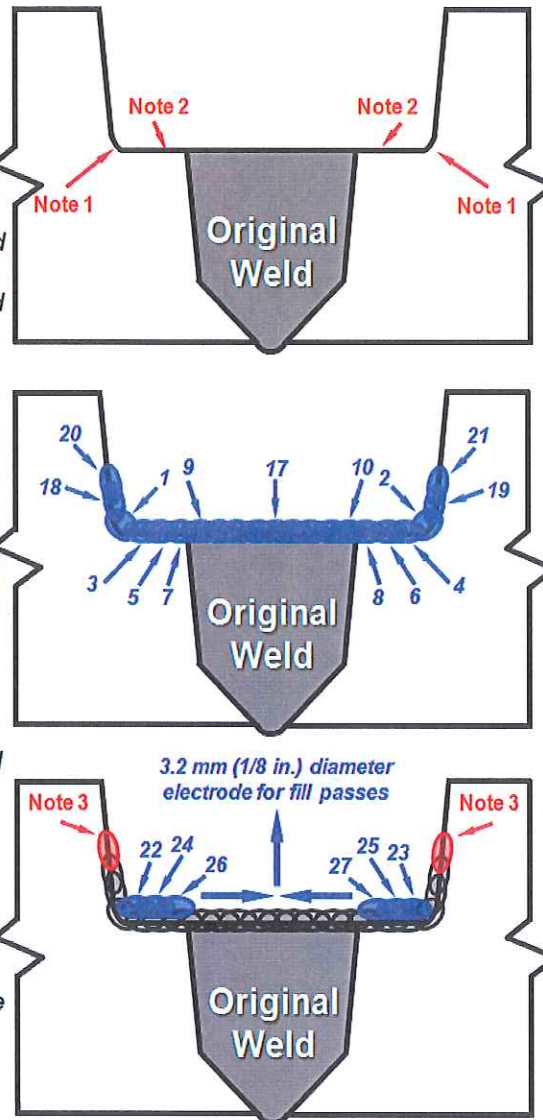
Schematic of the Controlled Fill Welding Procedure for Grade 91 Steel for a Partial Weld Repair of a Circumferential Girth Weld.
